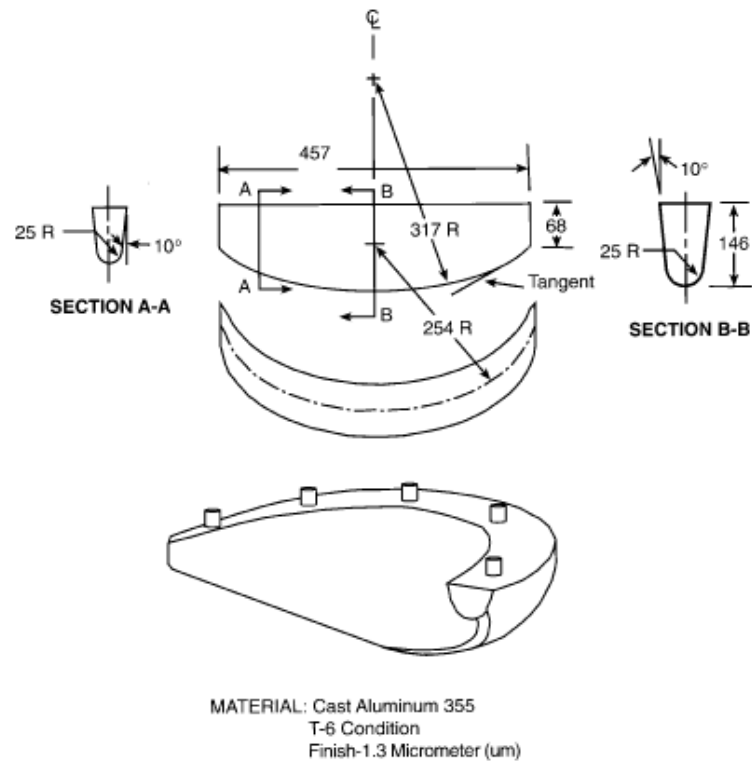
Diagram of Bead Unseating Block (all dimensions in mm)
